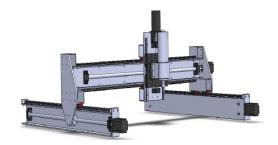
Detailed 3D model of the assembly of the upper portal of the milling machine with the installed G-PENNY MACHINE spindle and Nemo 23 stepper motors
